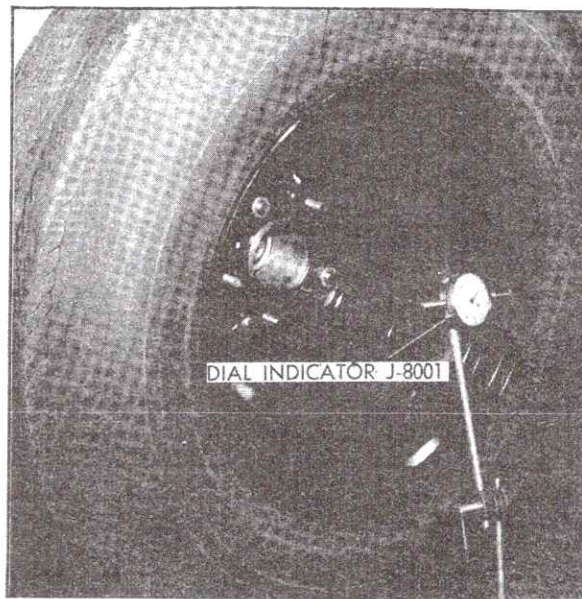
Checking Radial Runout At Bead Seat (693 Only)
